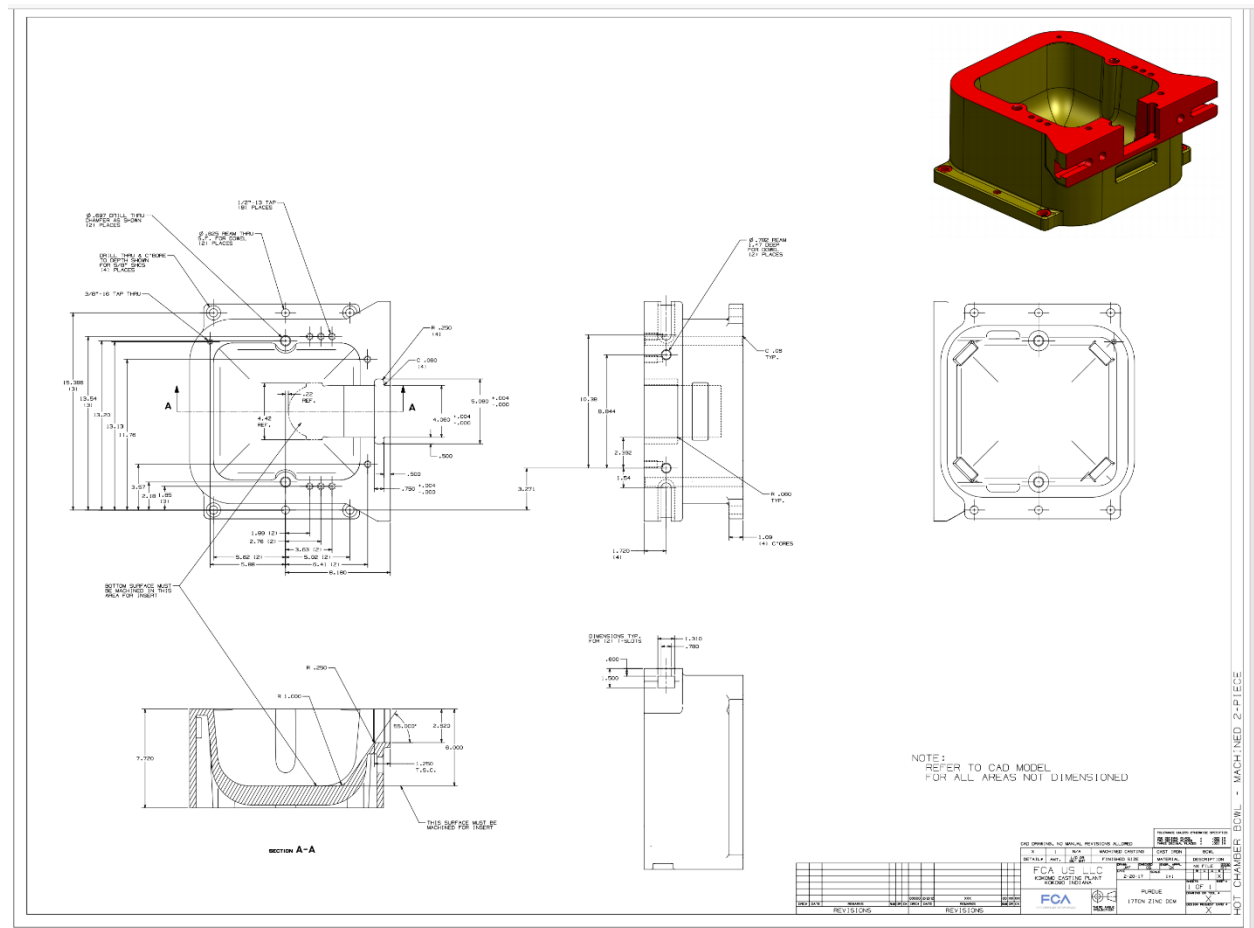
Dimensional drawing of redesigned melting pot with replaceable gooseneck
